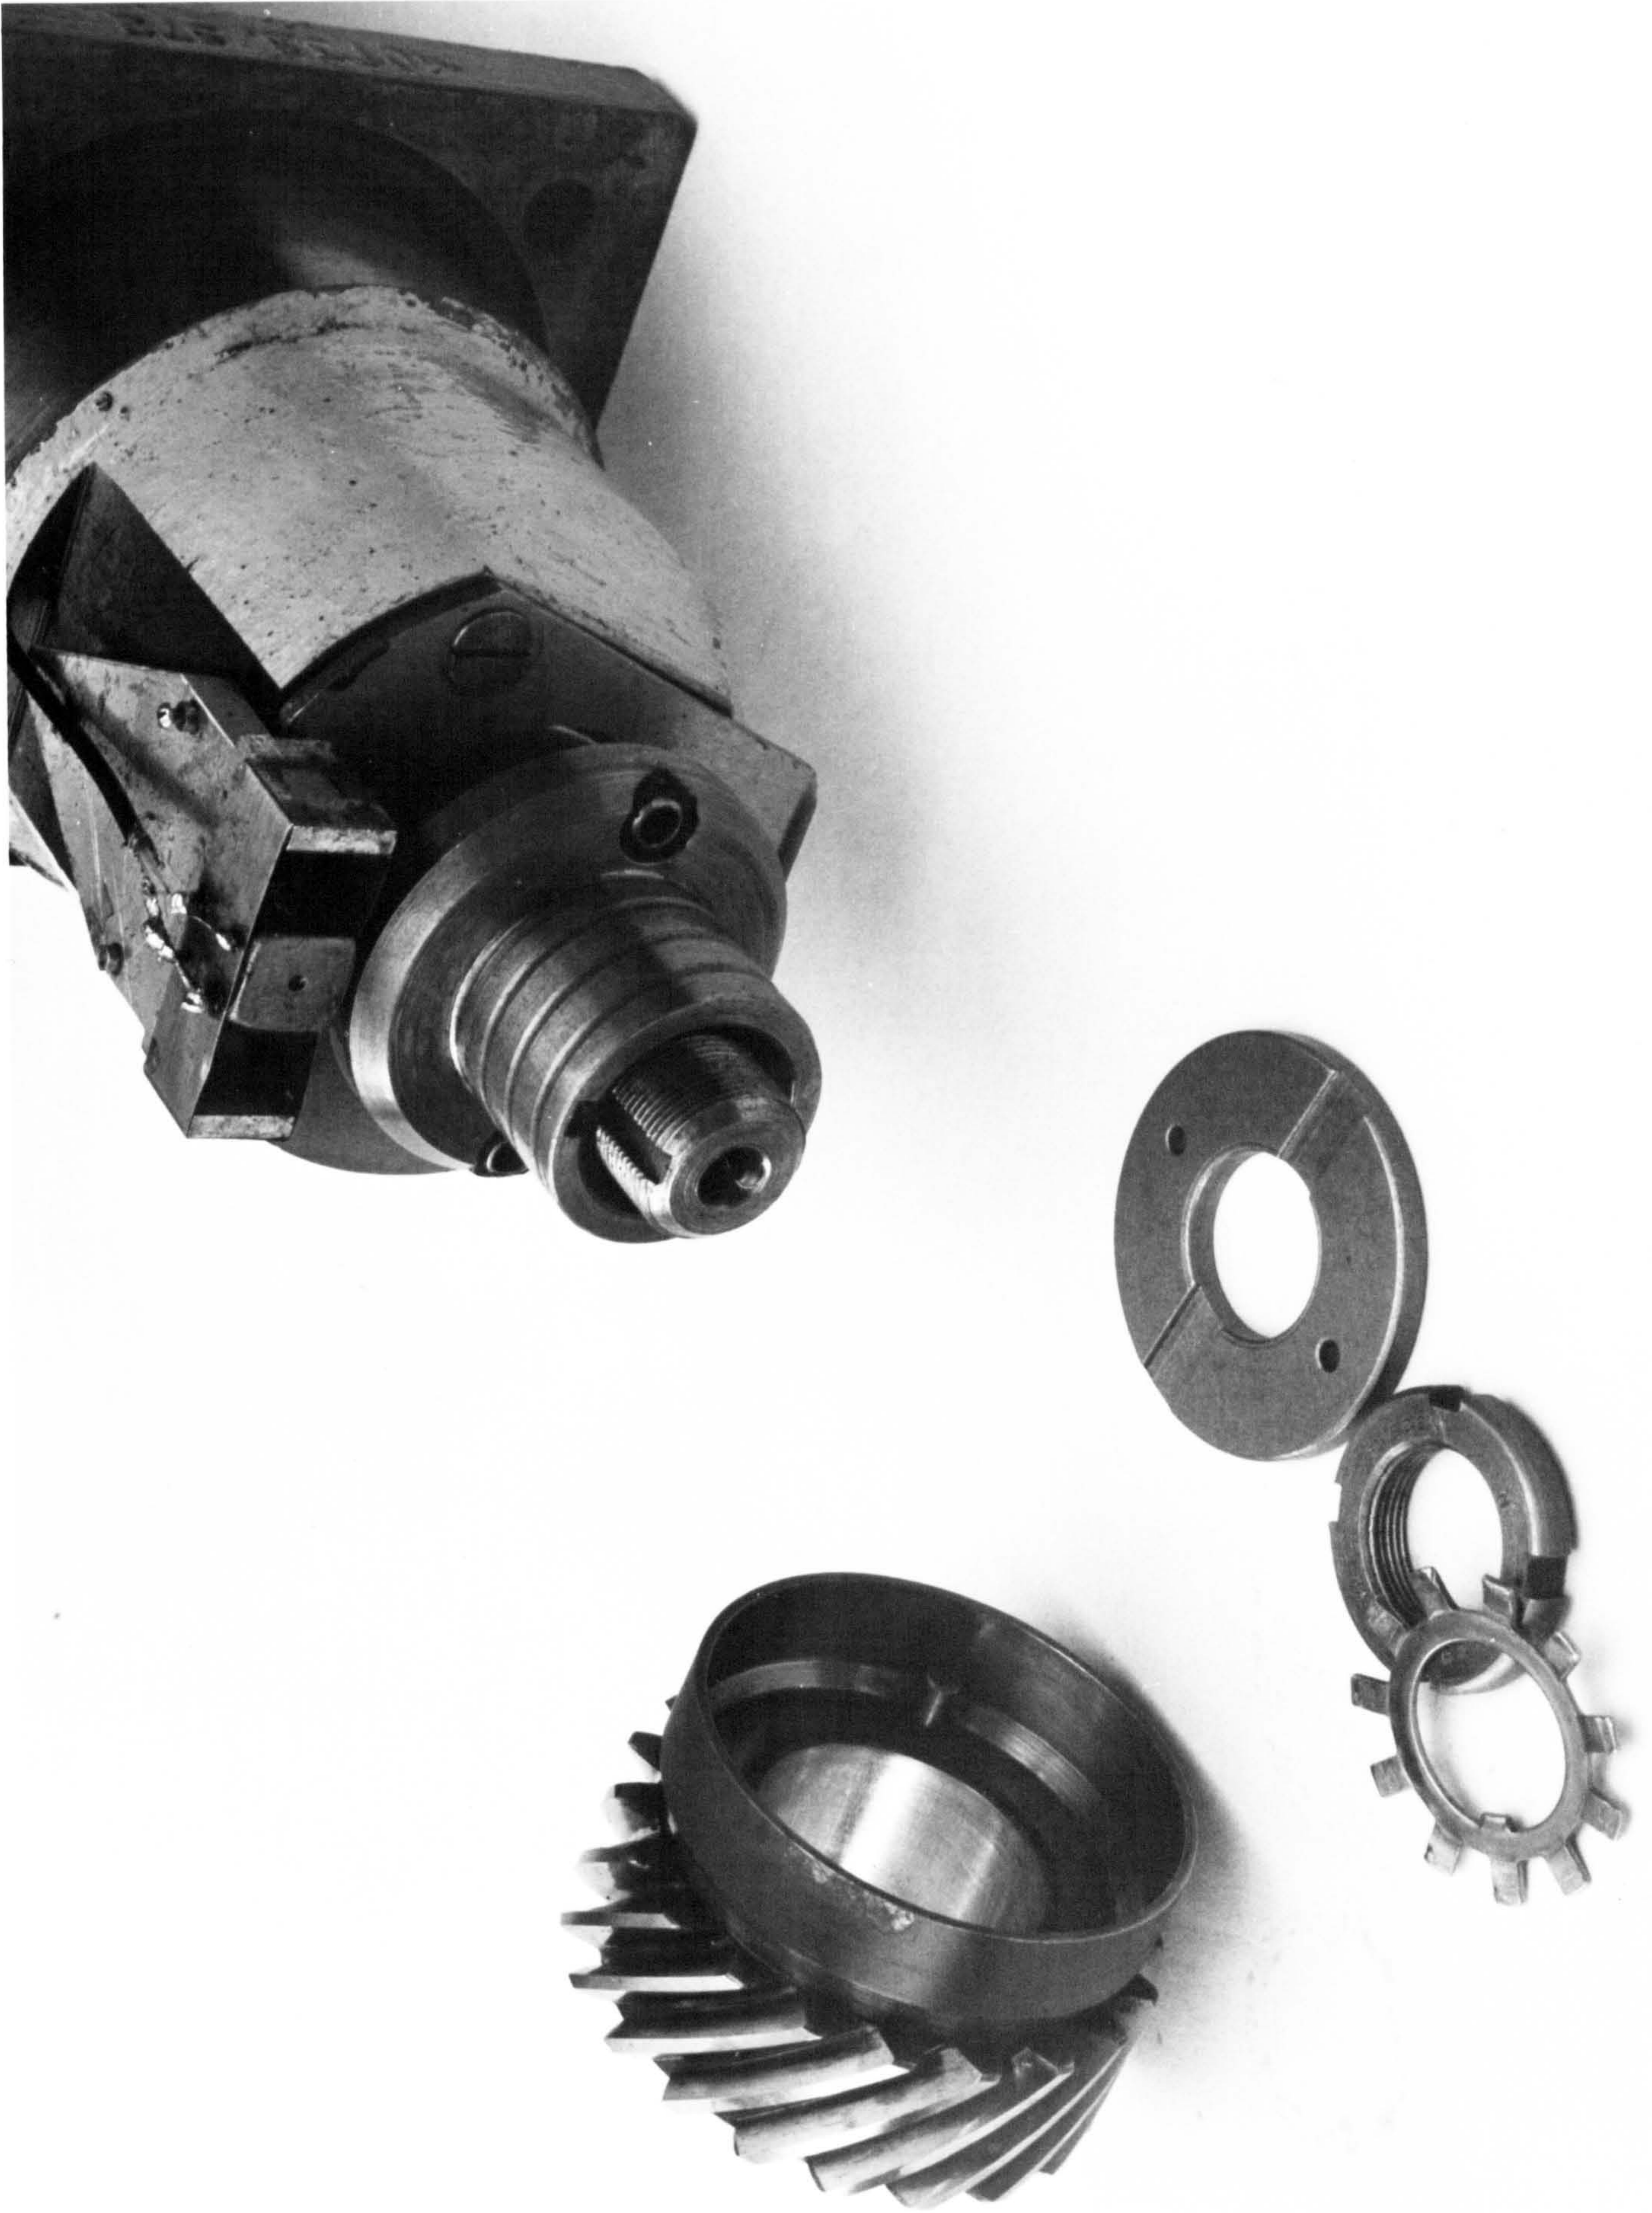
Magnetic Recording Drum and Head Mounting Arrangement
